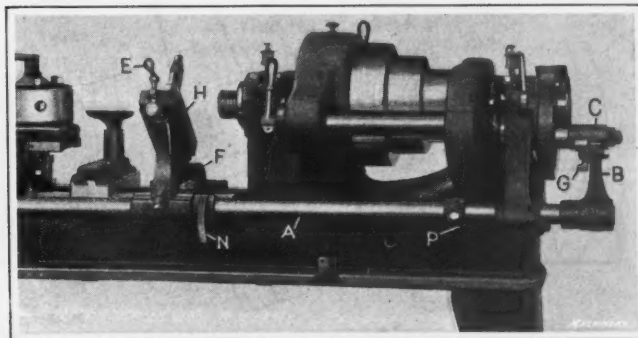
Rear View of Universal Turret Lathe equipped with Thread-chasing Attachment
